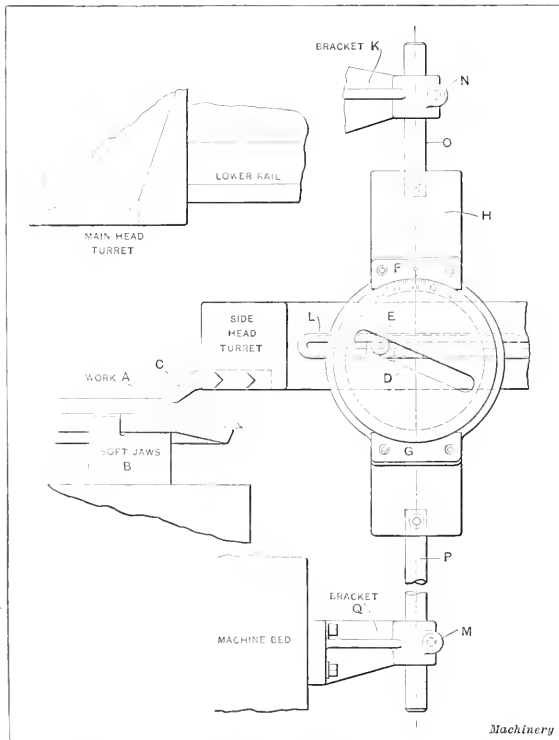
Vertical Side Head Forming Attachment for the Bullard Vertical Turret Lathe
